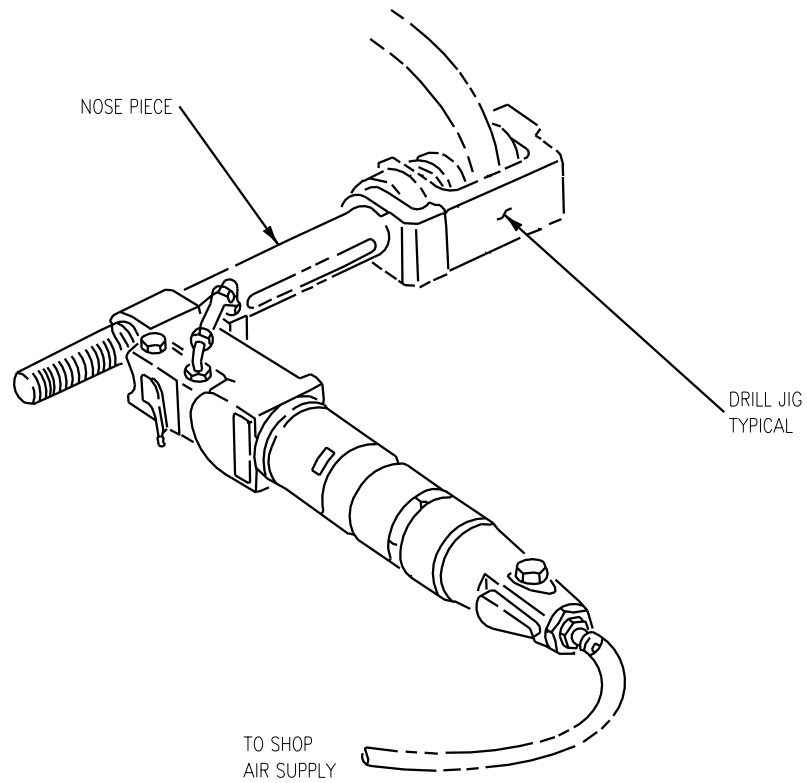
Typical Drilling Machine Setup (Sheet 2)
